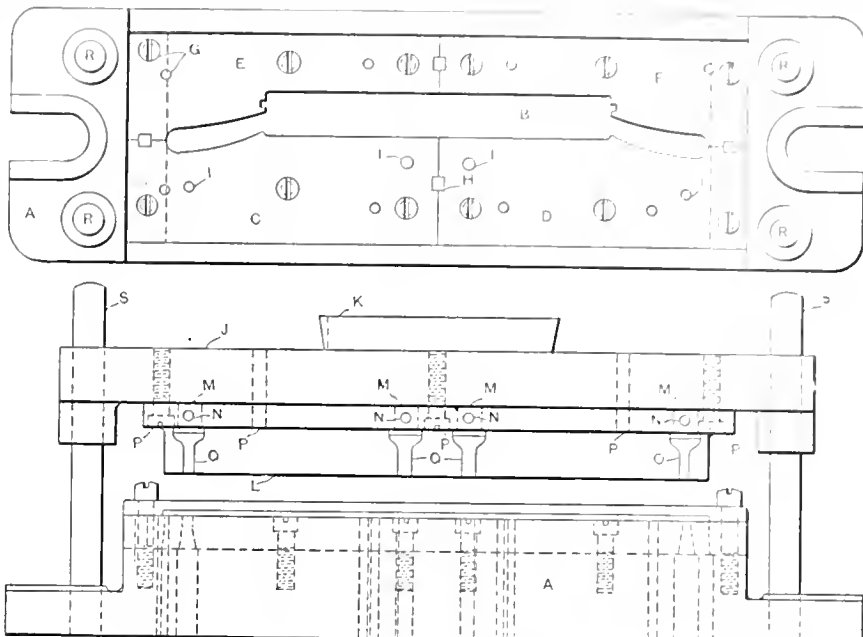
Plan and Elevation of Sub-press Die for Making Spring shown in Fig. 1
